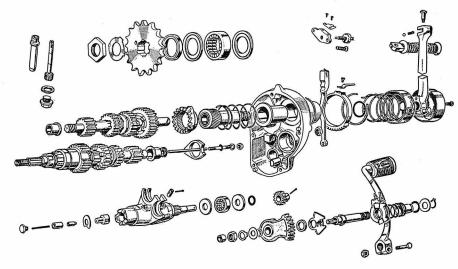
Exploded view of four speed transmission used on 2T and 3T.
